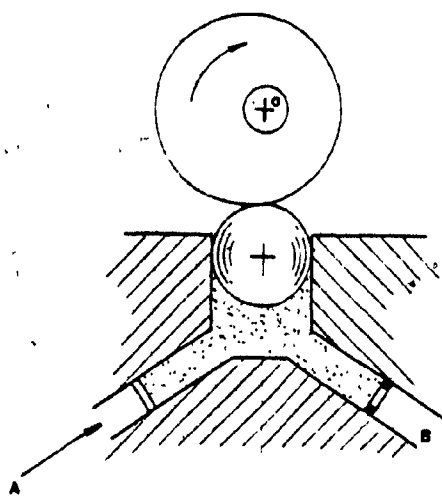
Basic Ball Piston Motor      Fig. 2.5. Conventional Piston Motor
